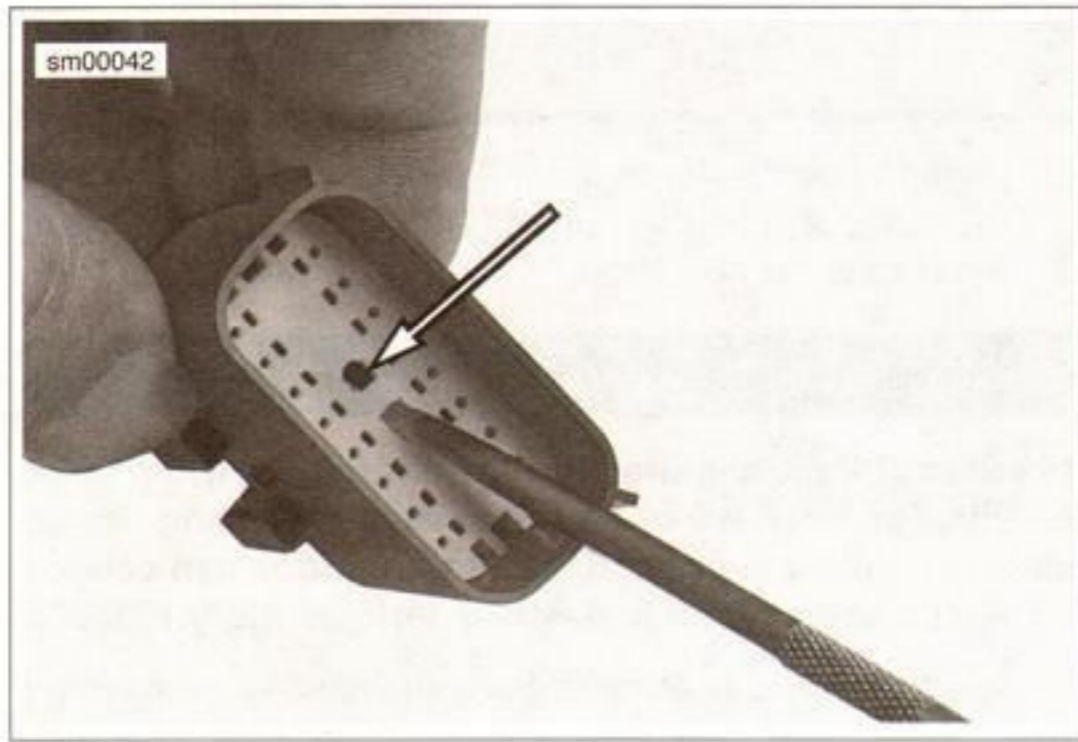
Molex Connector: Secondary Lock D-Holes (Pin Housing)
